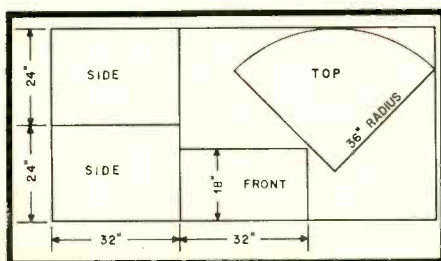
How to cut all the main panels from a single 4x8-foot sheet of plywood.
